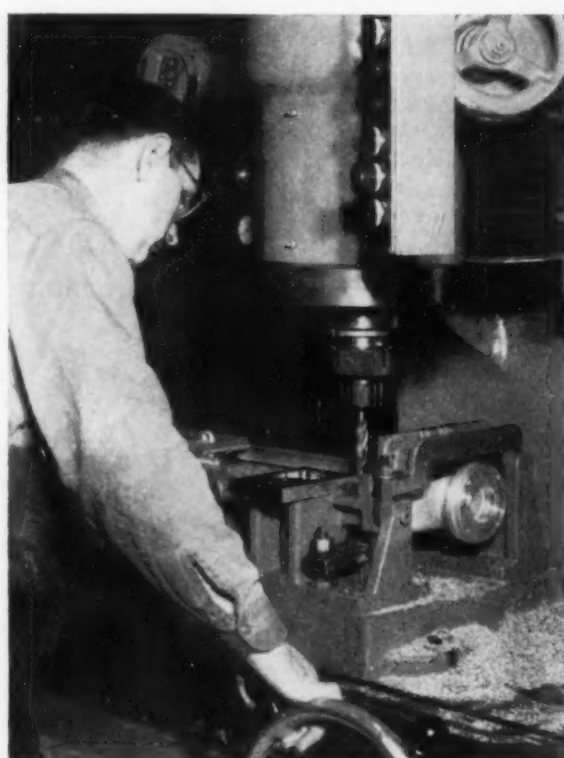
Step milling of inside pads and two outside surface pads is performed on this Reed Prentice mill.
